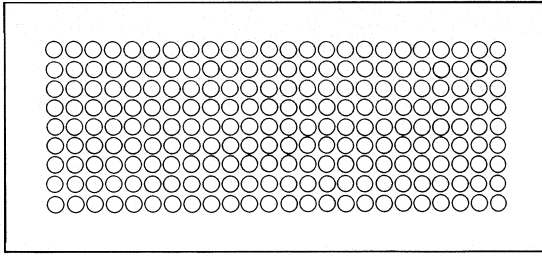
A drilling jig made of sheet metal 3.2-mm (1/8-inch) thick is handy for making your own perforated stock for areas requiring ventilation. Jig is about 20 cm (8 inches) long and 7.5 cm (3 inches) wide. Holes should be about 6.5 mm (1/4 inch) in diameter.
